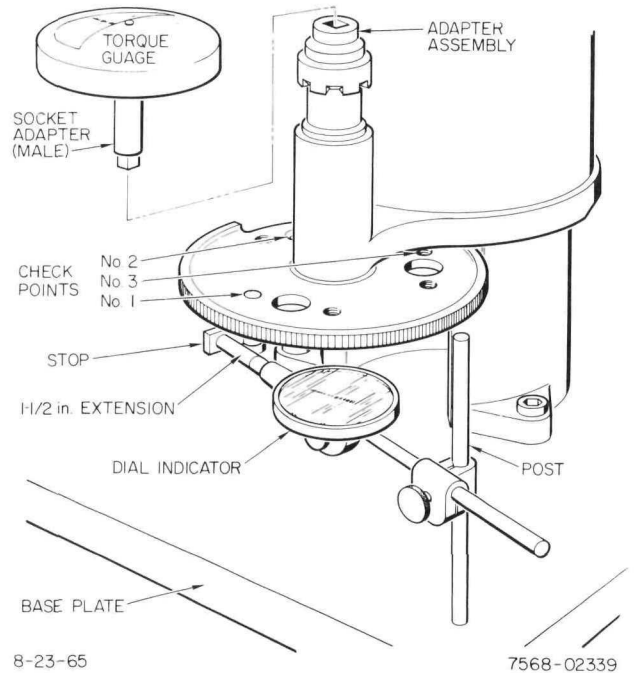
S8DS Scram-Drive Backlash Measuring Tool
